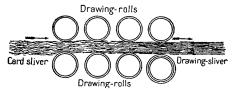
DETAIL OF DRAWING PRINCIPLE.
